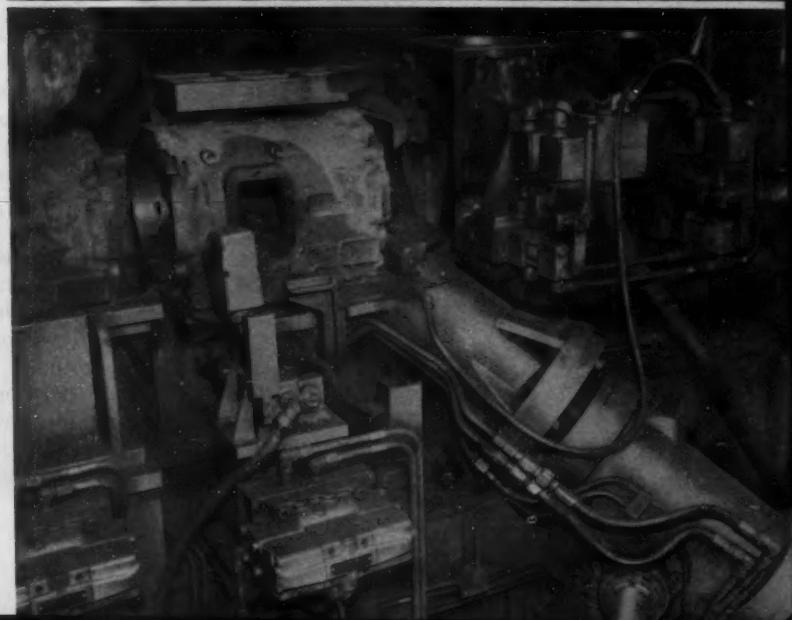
The first qualifying operation on the transmission case consists of grinding the oil-pan surface and core-drilling and boring two construction holes, on this rotary indexing machine.
